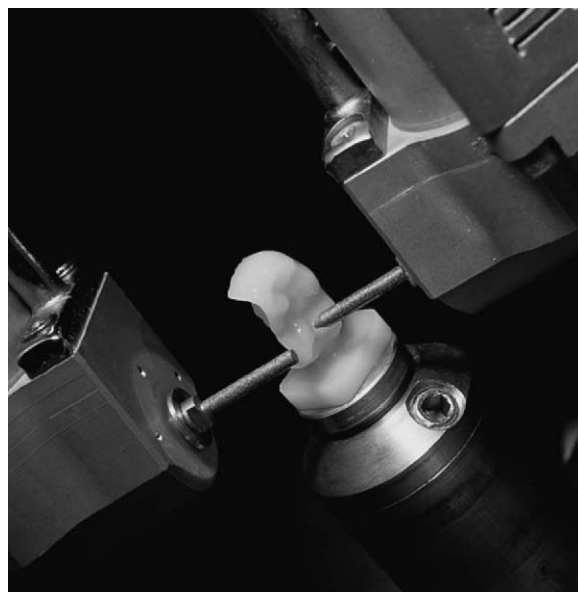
CAD/CAM machine milling a ceramic inlay. (Courtesy Sirona Systems.)
